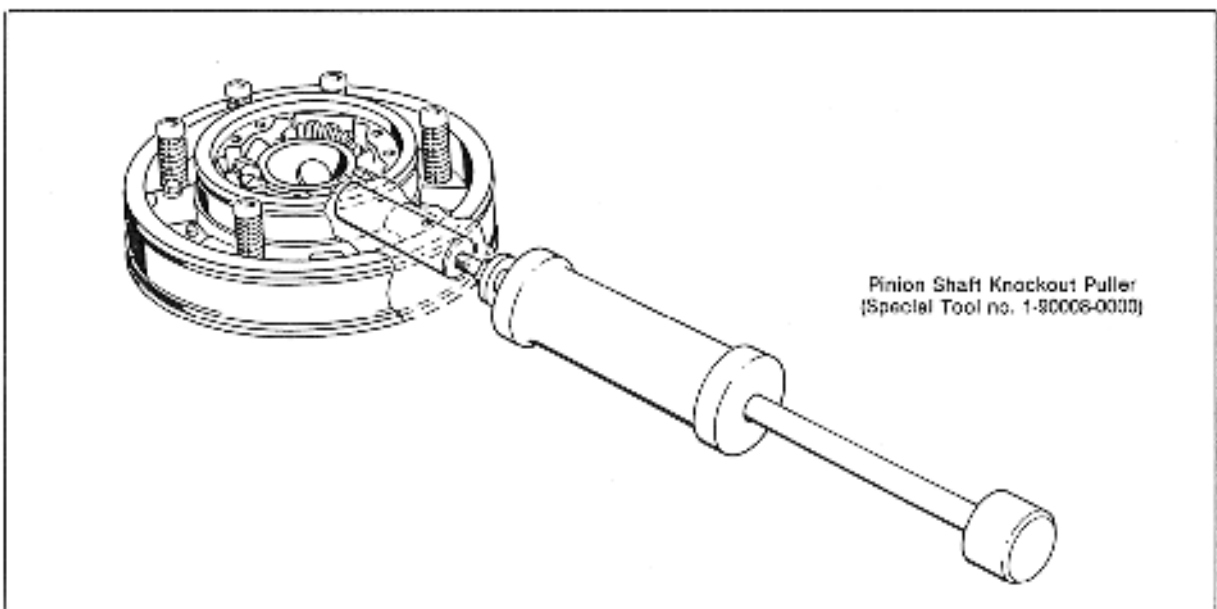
Removal of Pinion Shaft from Gear Carrier.
